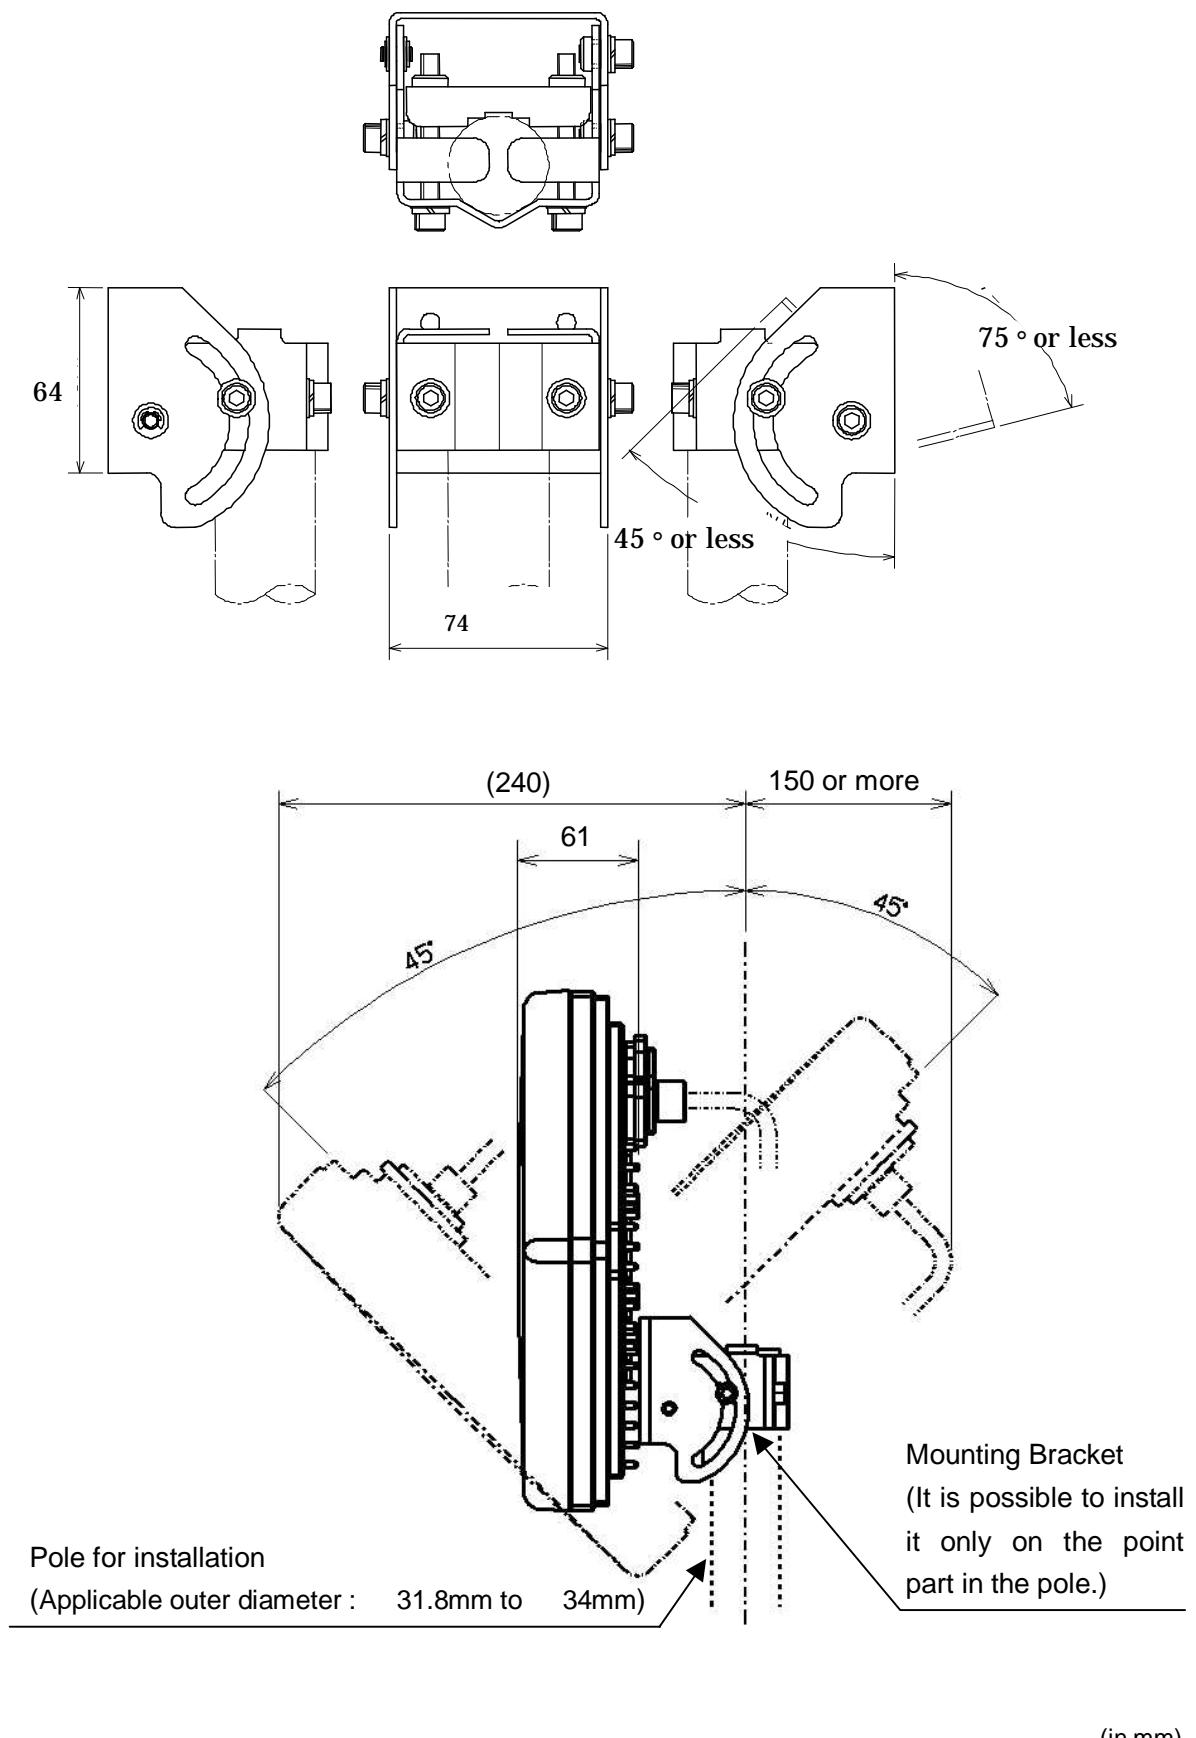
External View of the Outdoor Mounting Brackets for the WT
